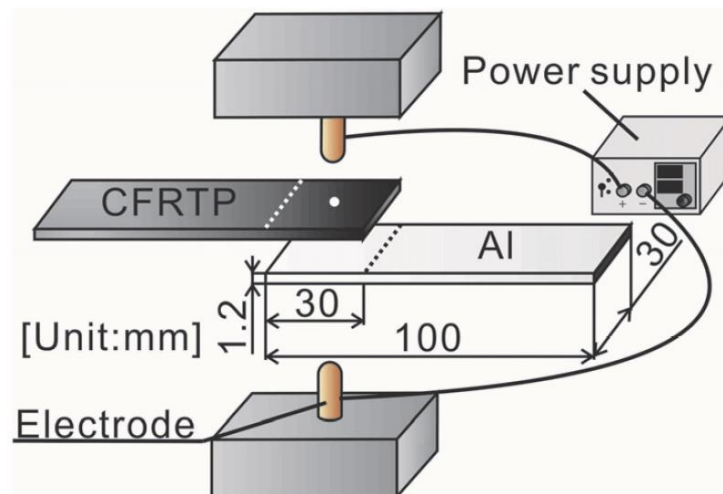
Schematic drawing of the resistance spot welding method⁵⁹⁾.
